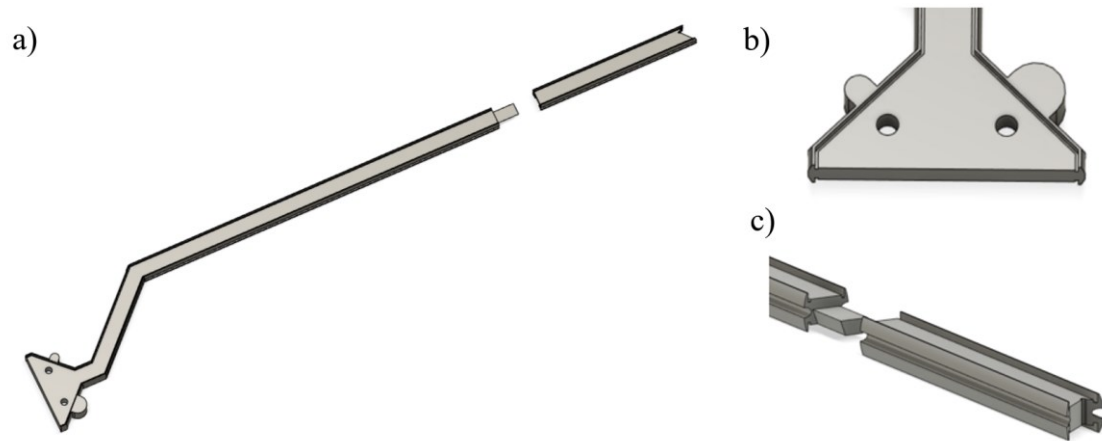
a) both pieces of the 3D print b) wings on the cable end c) channel and dovetail connection.
